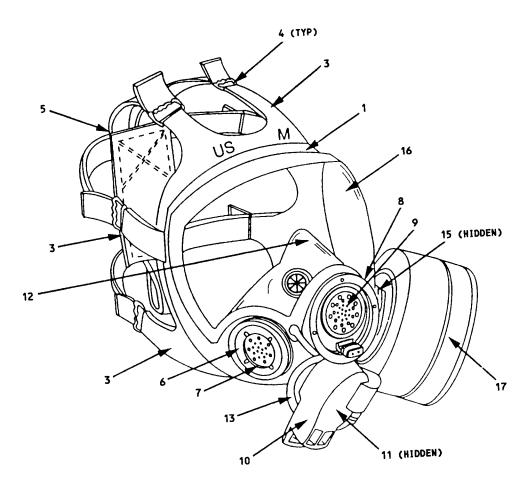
Mask Inspection (Sheet 1 of 3)
